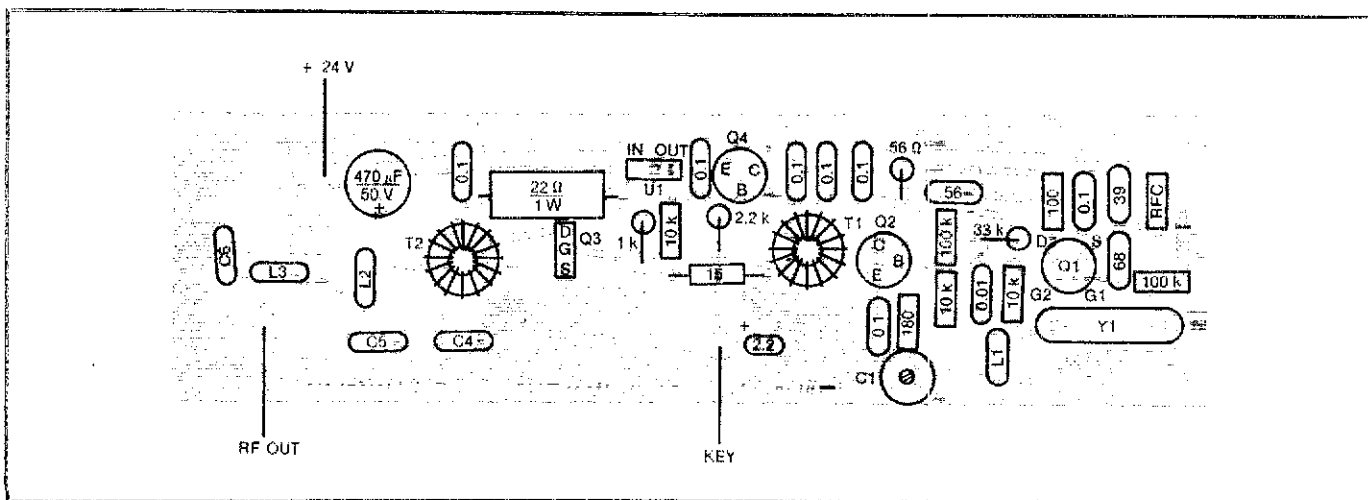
Parts-placement guide for the 30-meter exciter, as viewed from the component side of the pc board. See Hints and Kinks, this issue, for the etching-board pattern.
